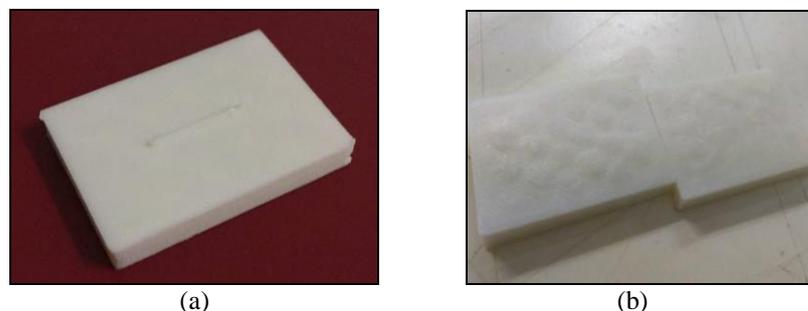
3D printed microchannels produced using different two 3D printers: (a) *ANYCUBIC DIY Kossel* (b) *Double Nozzle 3D Printer Creator Pro
